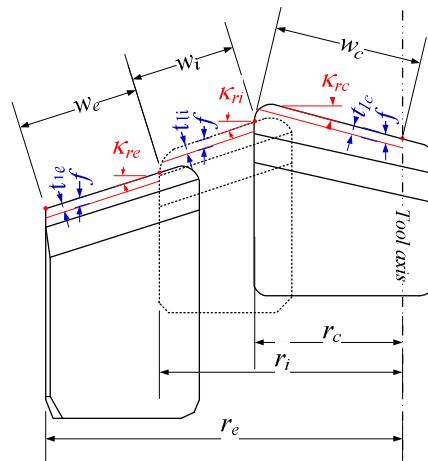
Engaged cutting edge width (w) and undeformed chip thickness (t_1) of each insert of the BTA deep hole drilling tool.
